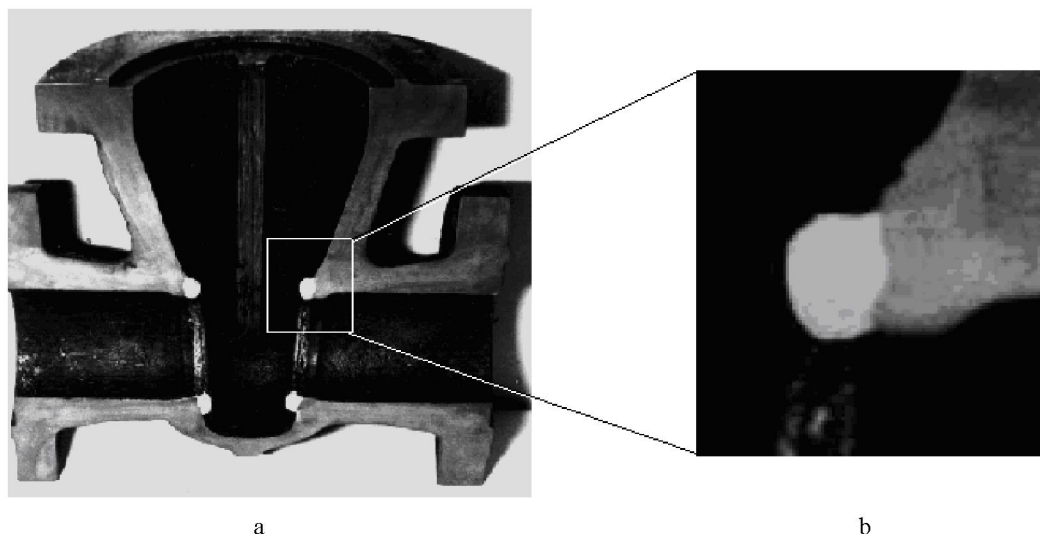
DN 80 fitting body after MAG cladding of sealing surfaces of the saddles:
